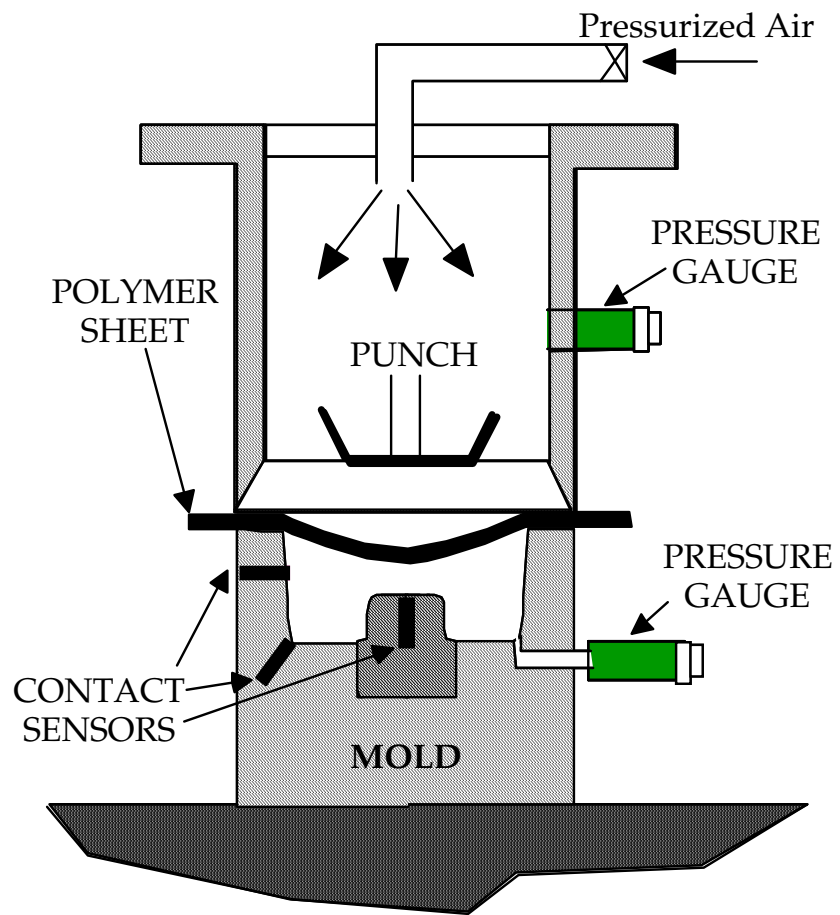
Axisymmetrical thermoforming machine with contact and pressure sensors.
